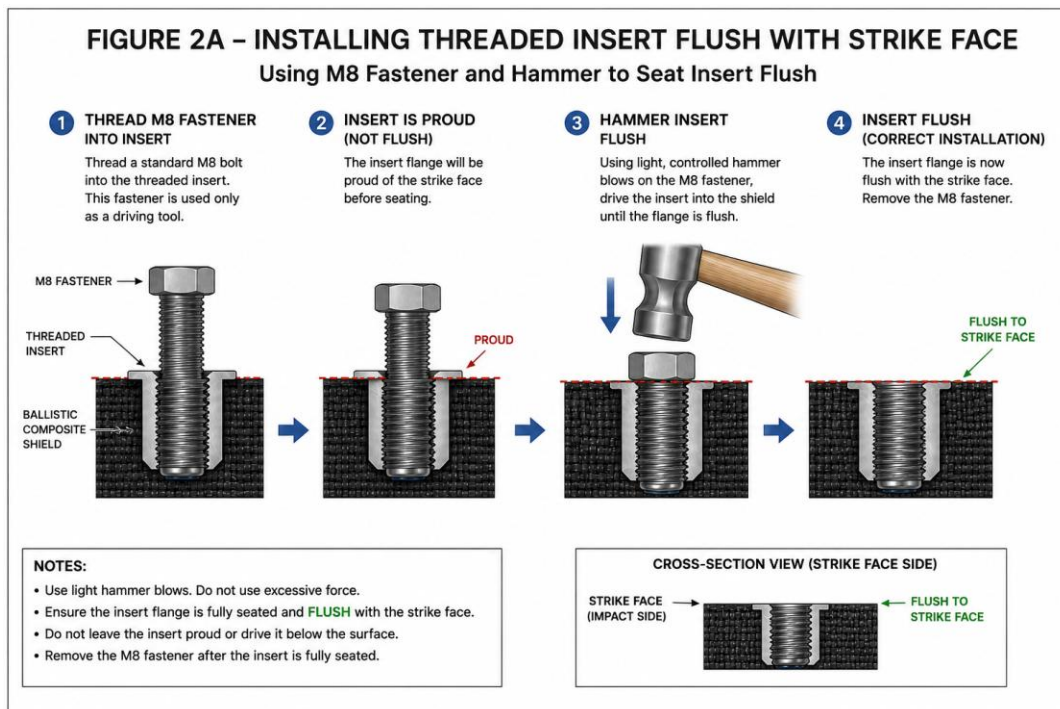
Use a temporary M8 fastener and light hammer blows to seat the threaded insert flush with the strike face.
